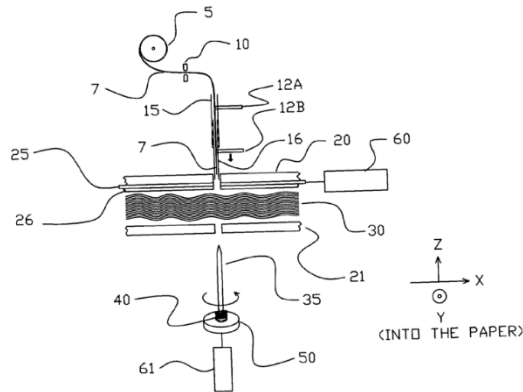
Side view of the dry-fibre Z-pin insertion machine [6]
